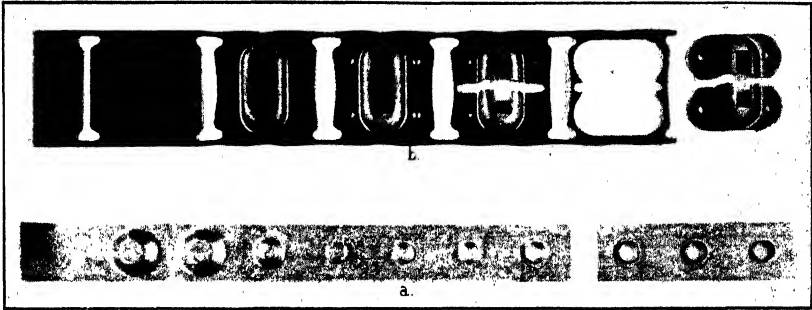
An eyelet type job (*a*), and a drawing follow-die job (*b*), in each of which other operations are combined with drawing.
